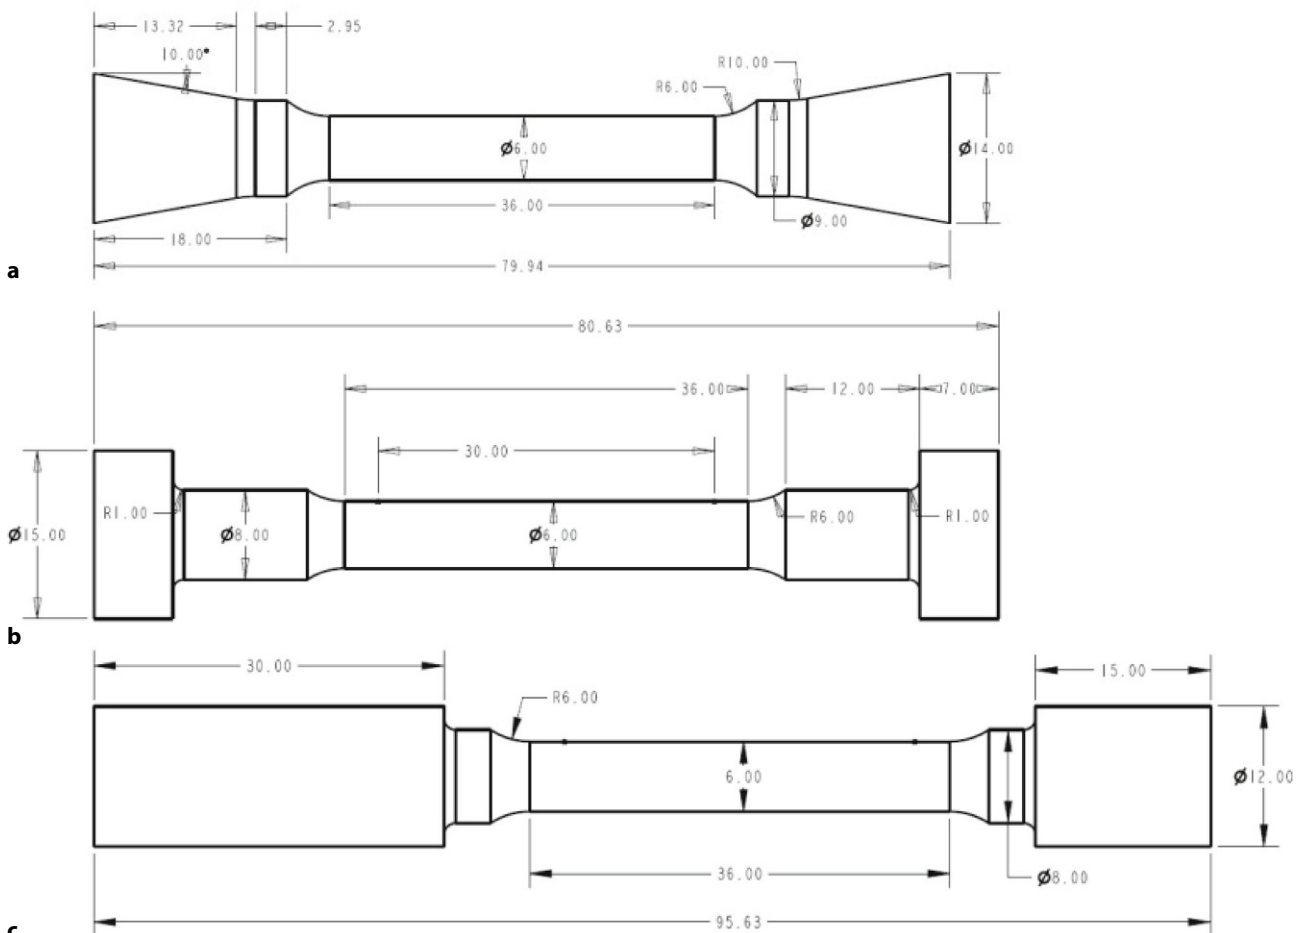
Cylindrical specimen design for a Gleeble b Zwick Roell, and c Instron test rig with clamping mechanically turned to M10
